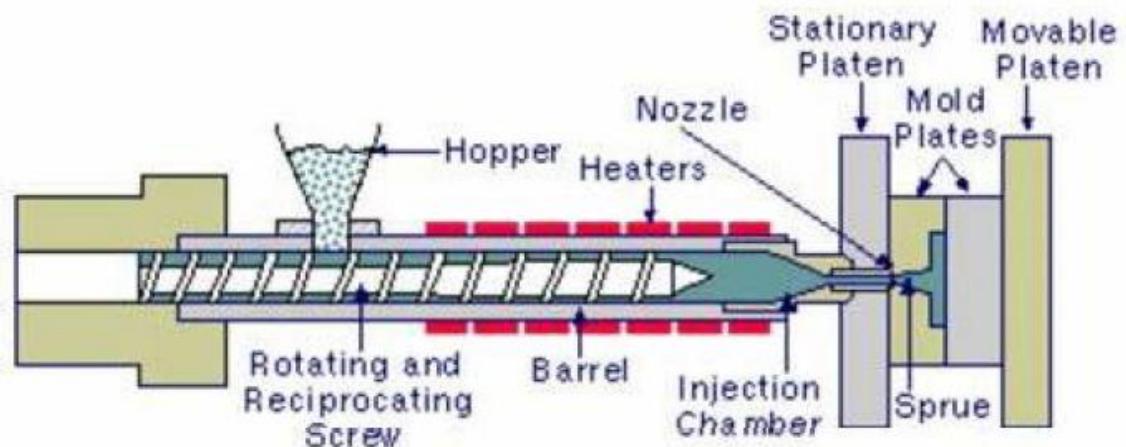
Single screw injection molding machine. (Srebrenkoska, Gaceva and Dimeski, 2009)
